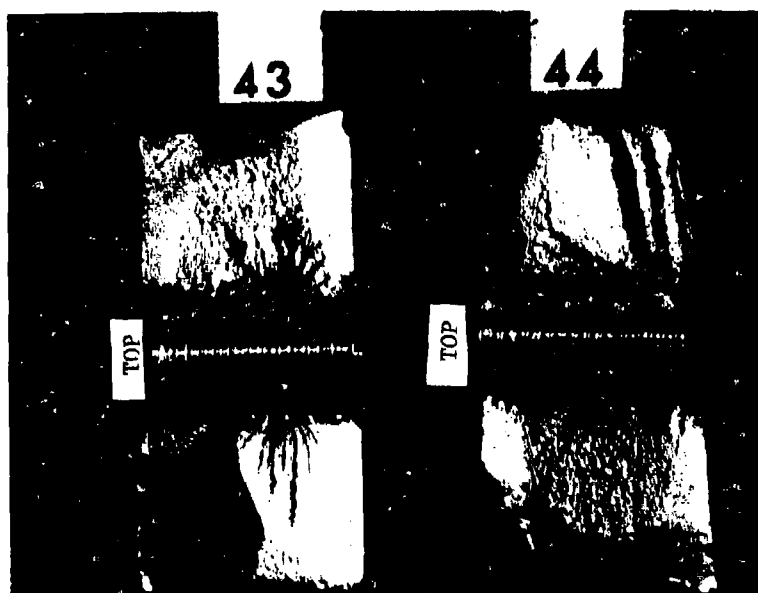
Close-up of Fatigue Failures of Specimens with Long-Lok and Heli-Coil 3/8-24 Size Inserts. Inserts Installed by AFML. Torqued Bolts in Inserts During Tests.
